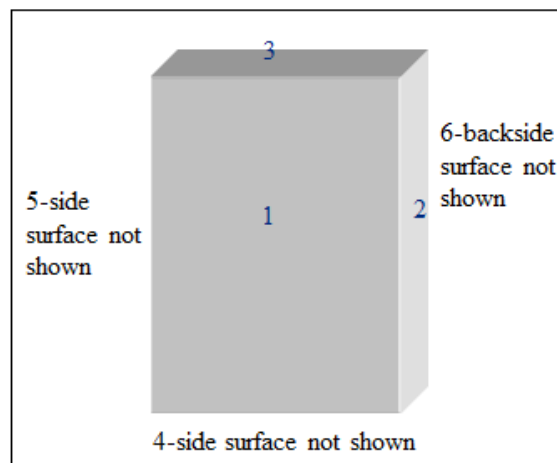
Vacuum-Cast Propellant Blocks, Depicting six Measured Surfaces
